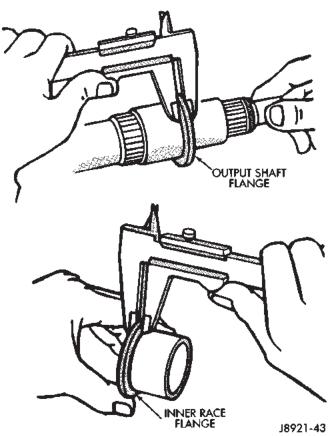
Check Shaft And Bearing Race Flange Thickness
